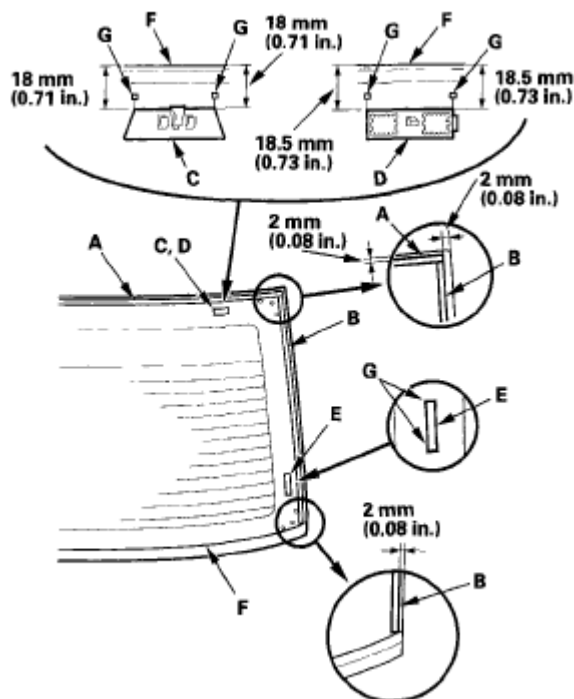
Attaching Upper Rubber Dams, Side Rubber Dams And Clips (With Specifications)
